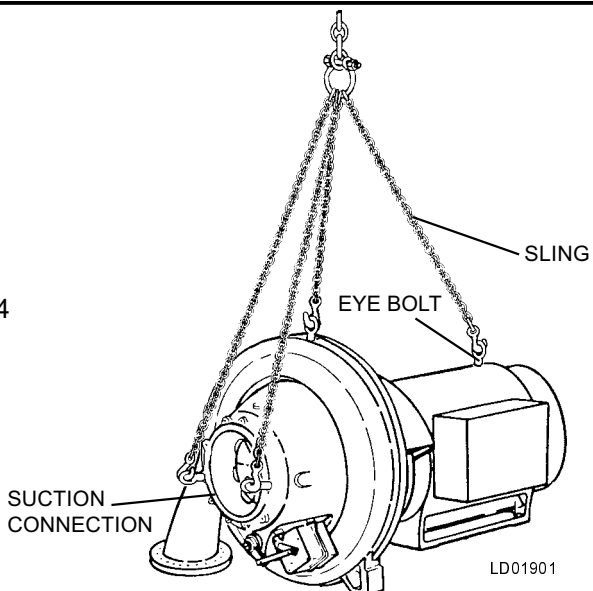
RIGGING COMPRESSOR ASSEMBLY
